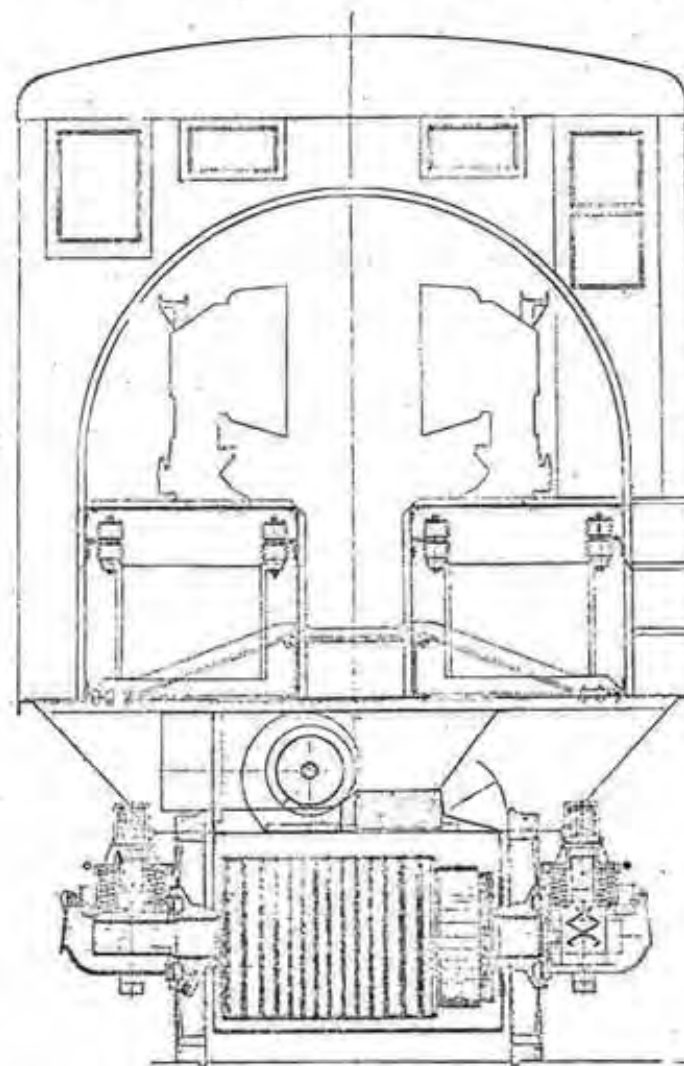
CROSS-SECTION OF APPARATUS CAB
